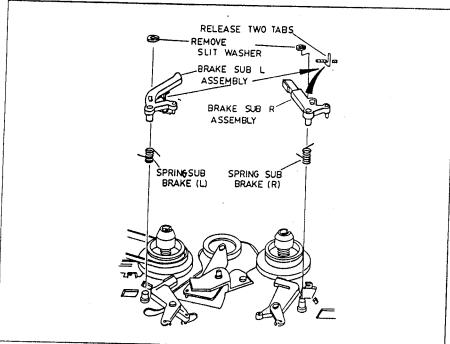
Brake Sub (R) Assembly and Brake Sub (L) Assembly Removal
